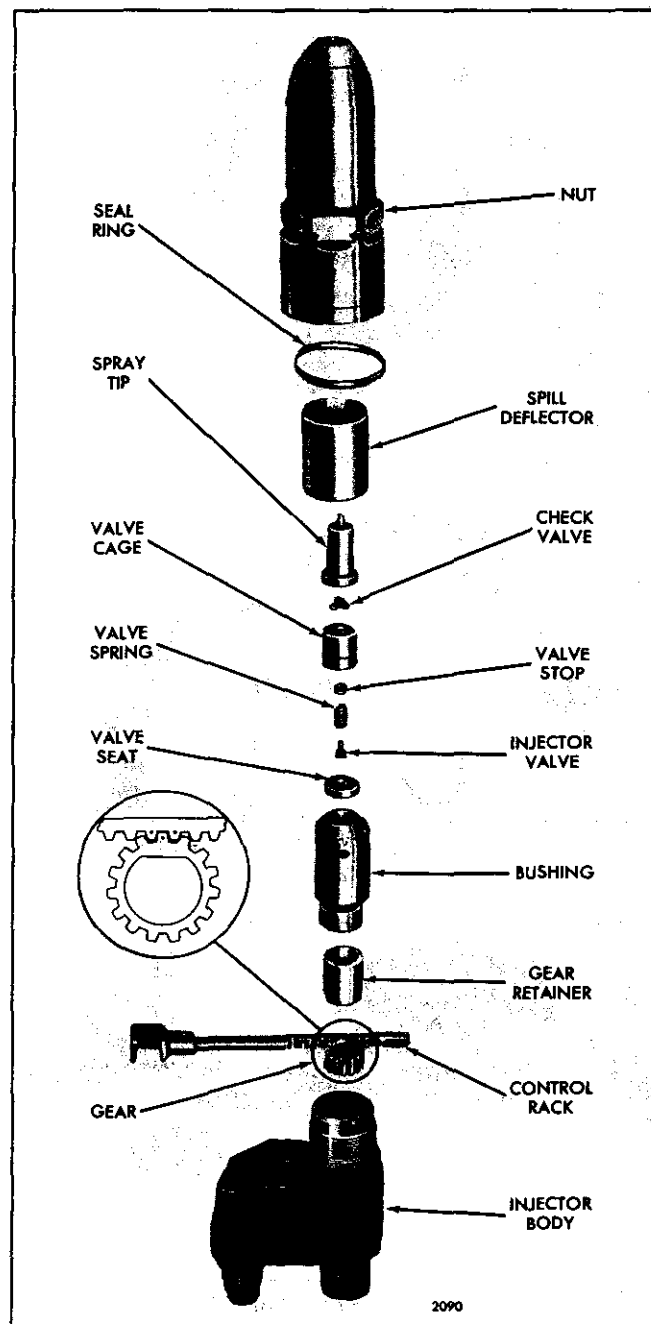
Injector Rack, Gear, Spray Tip and Valve Assembly Details and Relative Location of Parts
